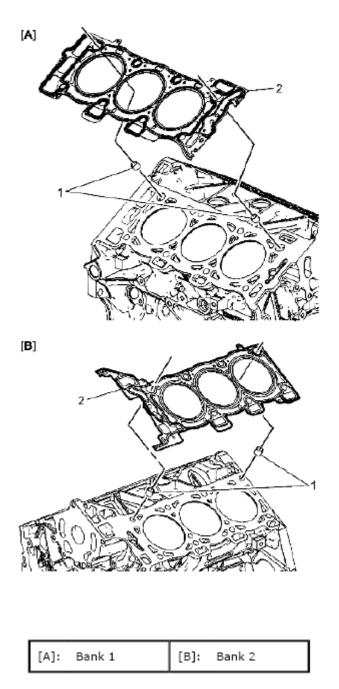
Identifying Cylinder Head Gaskets Courtesy of SUZUKI OF AMERICA CORP.
